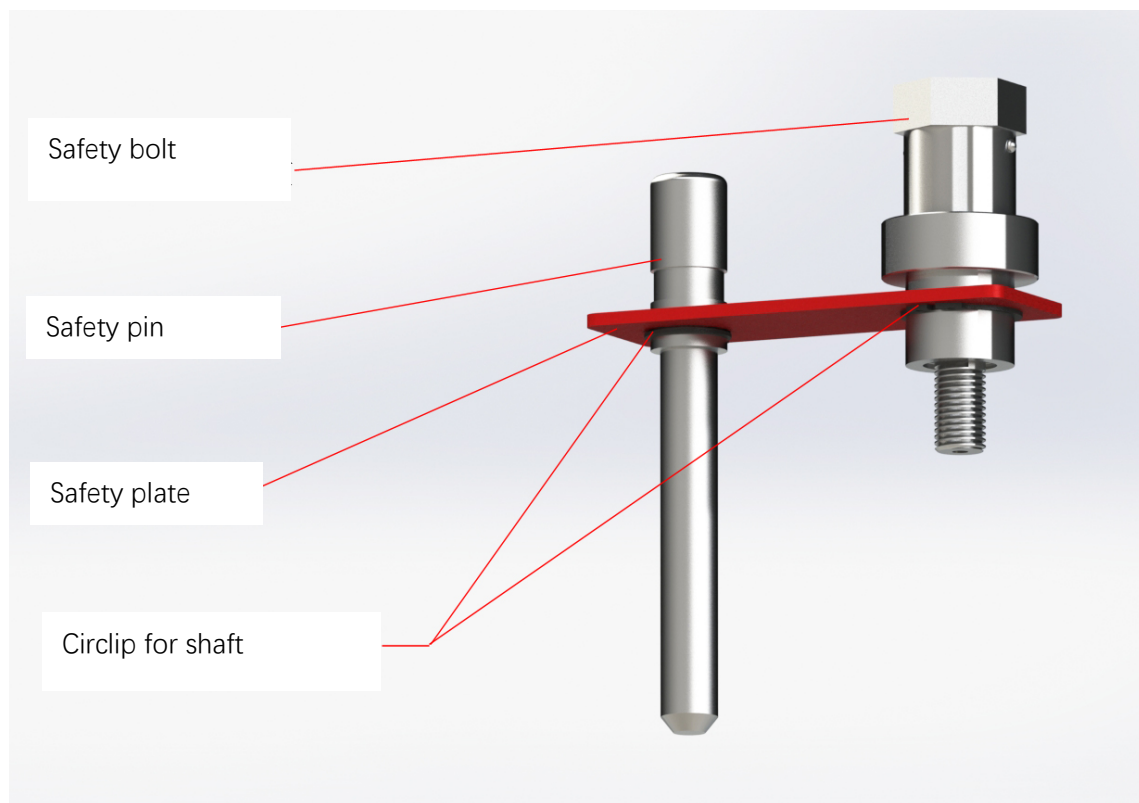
Clamp Type Quick Opening Blind Plate Safety Interlock Device
